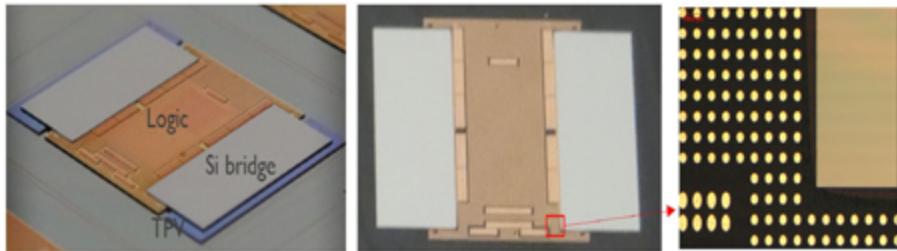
Pictures illustrating steps 5 to 8: a) (left) after die placement and bridge bonding; b) (middle) after molding and back grinding, and c) (right) exposed Cu pillars on the package surface.
